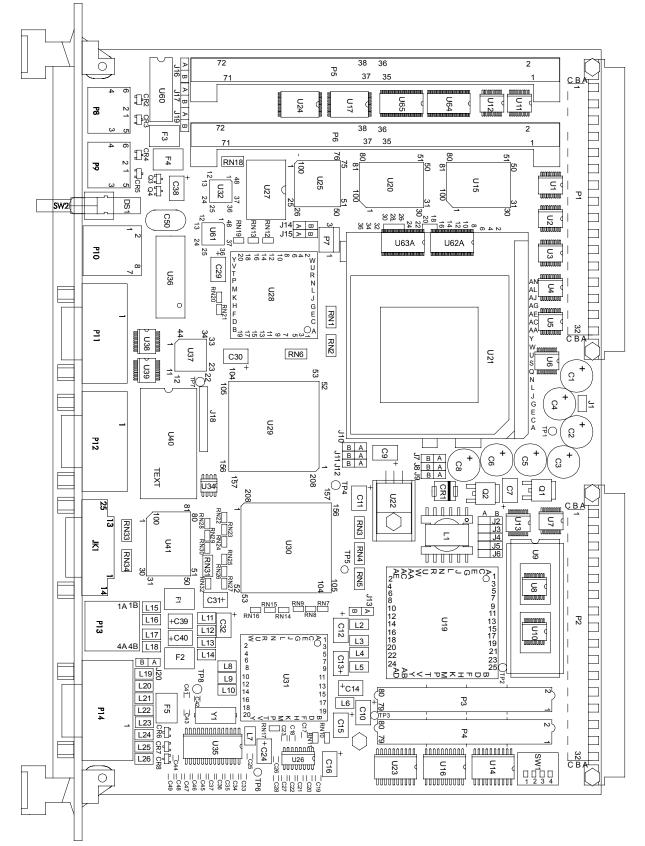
Assembly Drawing for XVME-658 and XVME-653/31x
